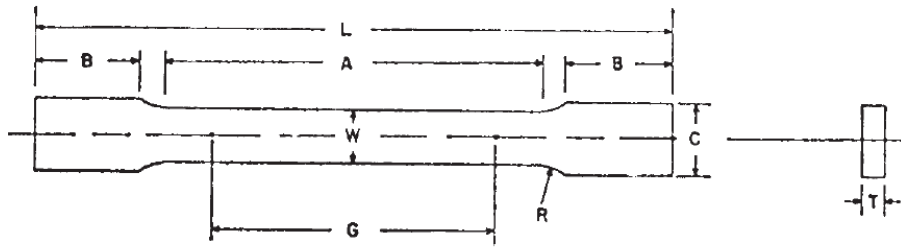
Standard test specimen dimensions (ASTM-E8M 2004)
